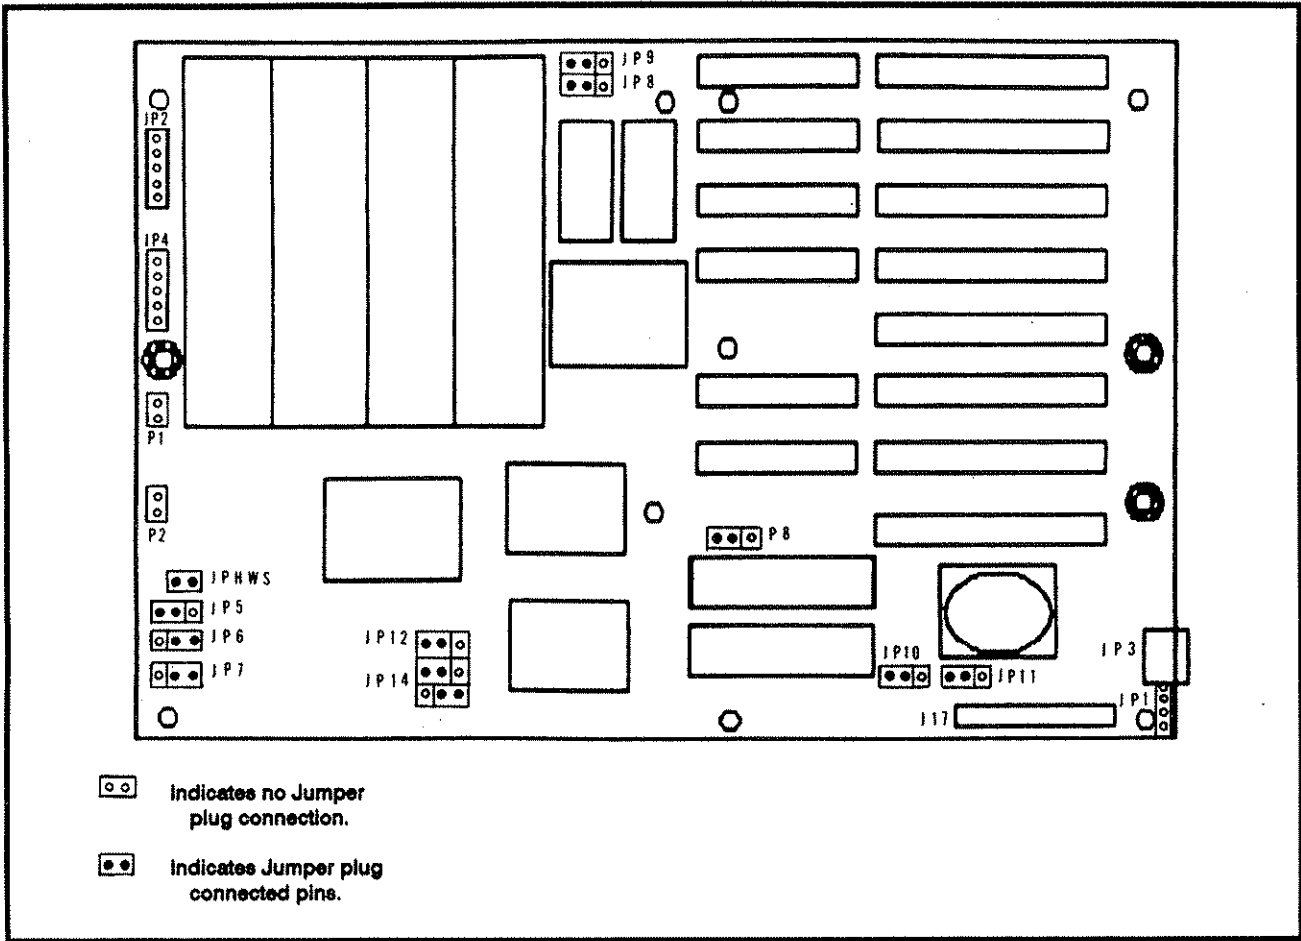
CPU Mother Board Assy 4A1, Jumper Plug Locations.
